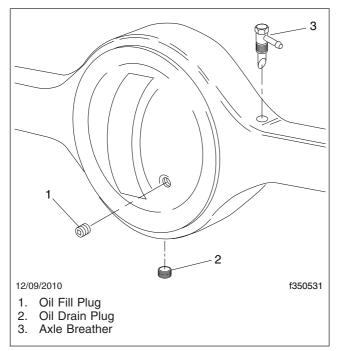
, Fill Hole Plug Location, Dana Spicer Axles
